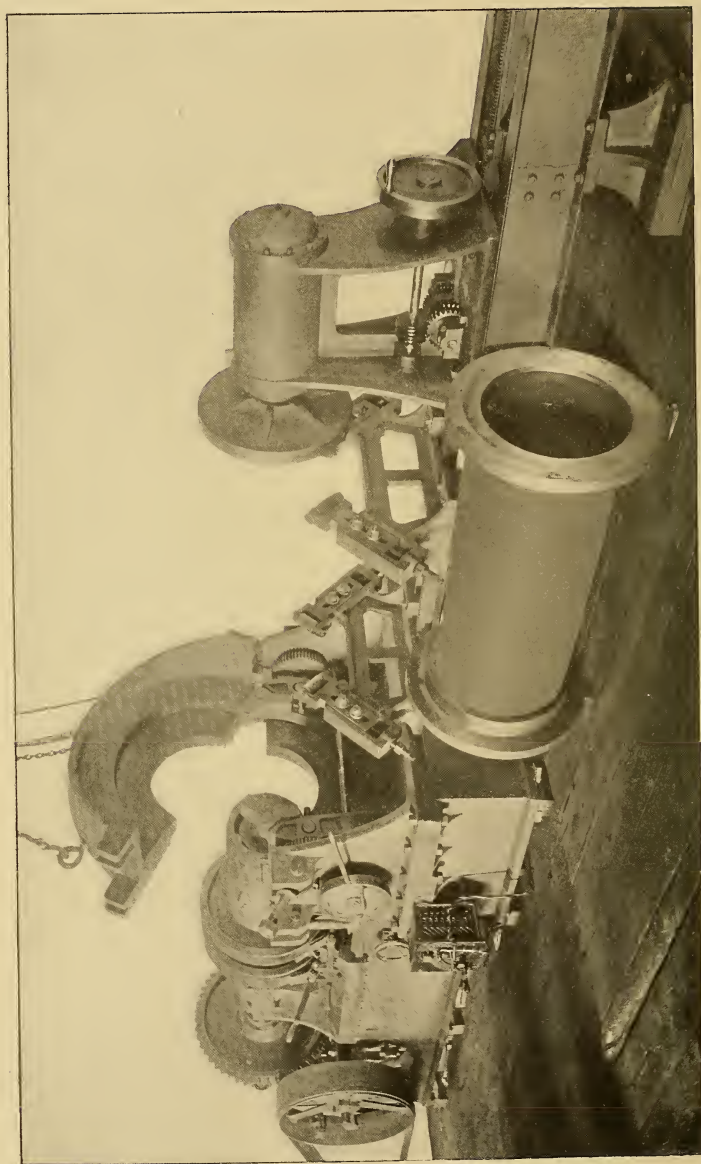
A LARGE EXPANDING MACHINE FOR STEEL PIPES UP TO 26 INCHES IN DIAMETER, SHOWING A 20-INCH PIPE ALONGSIDE WHICH HAD BOTH FLANGES EXPANDED, FLARED AND FACED COMPLETE IN ONE HOUR
